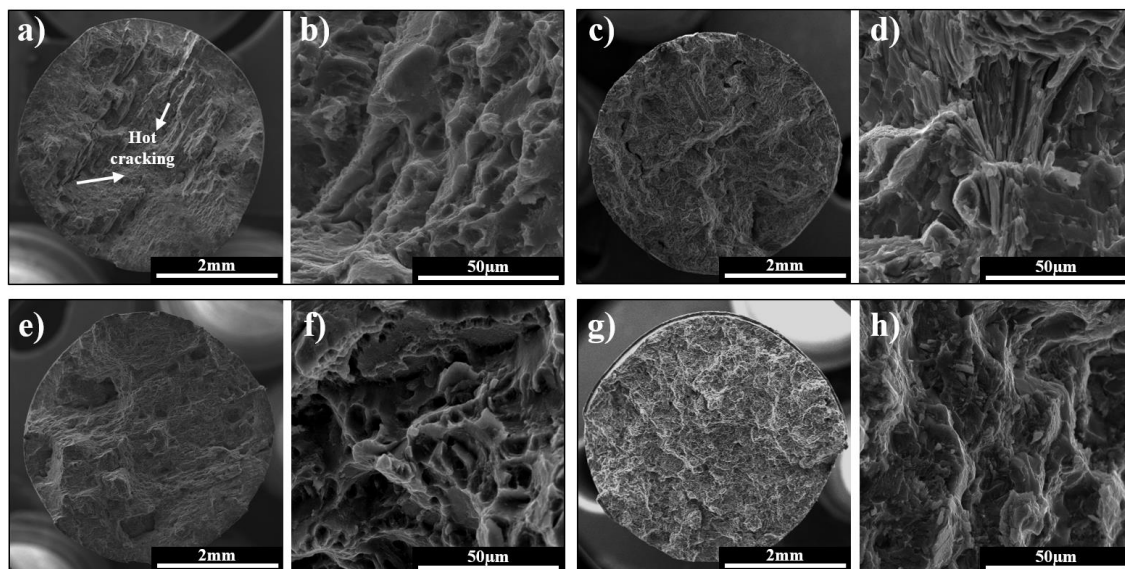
87 – Tensile fracture surface characteristics of M1_0Ce (a – d) and M1_3Ce (e – h) parts processed by LPBF (a-b, e-f) and graphite casting (c-d, g-h) manufacturing techniques using specimens with a cylindrical geometry.
